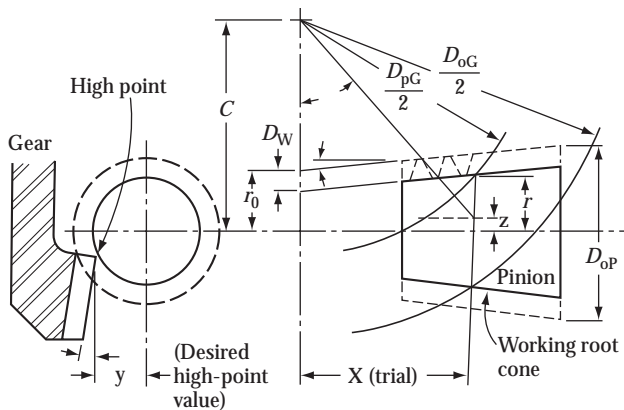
Gear tooth high point—Spiroid gearing.
